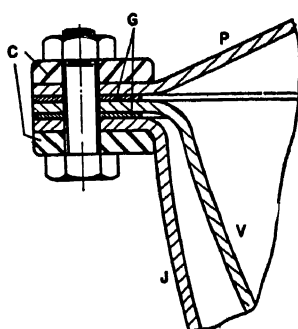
Closure Details and Jacketed Vessel Construction.
